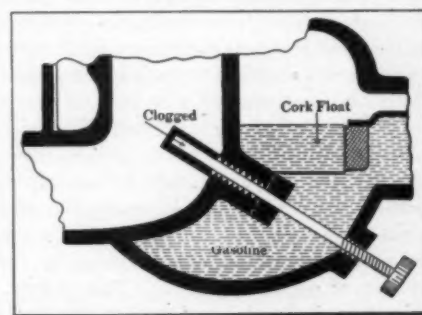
Section through carburetor, showing needle valve which is apt to clog
